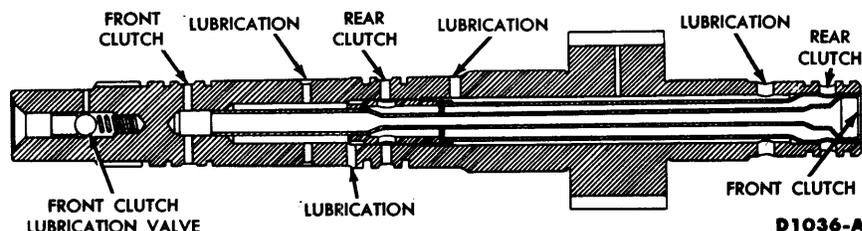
Cross-Section of Primary Sun Gear Shaft
